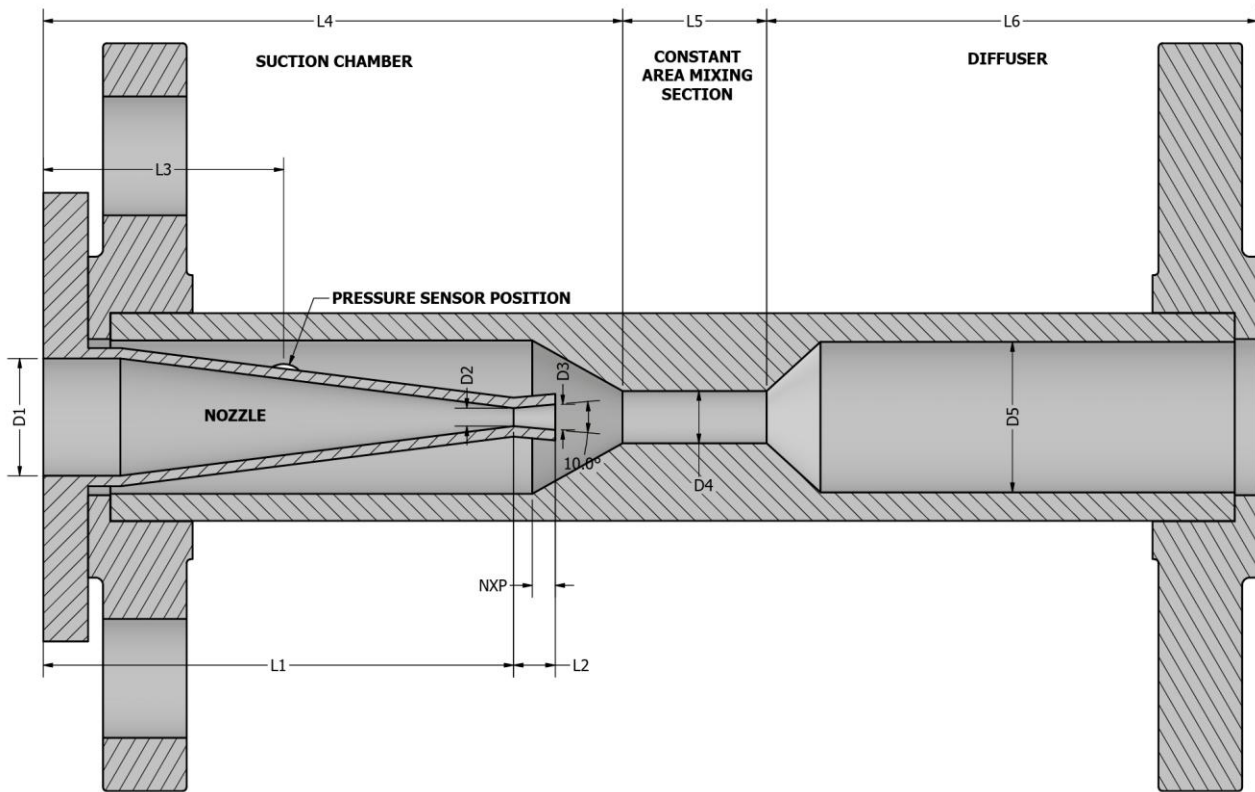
Drawing of the ejector's design, the main dimensions are shown in Table 2
